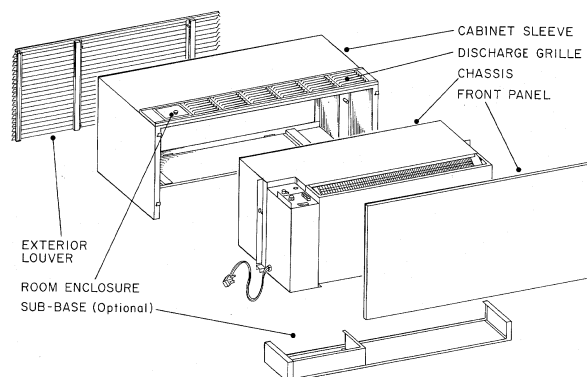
Packaged Terminal Air Conditioner with Combination Heating and Cooling Chassis
